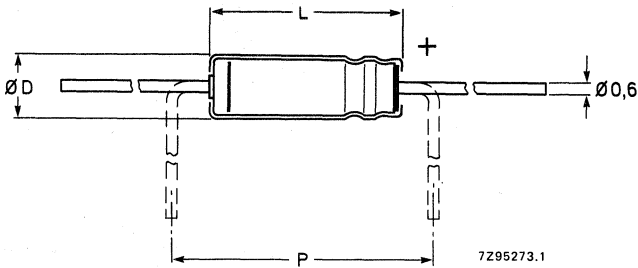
Style 1; see Table 1a for dimensions D, L and P.
